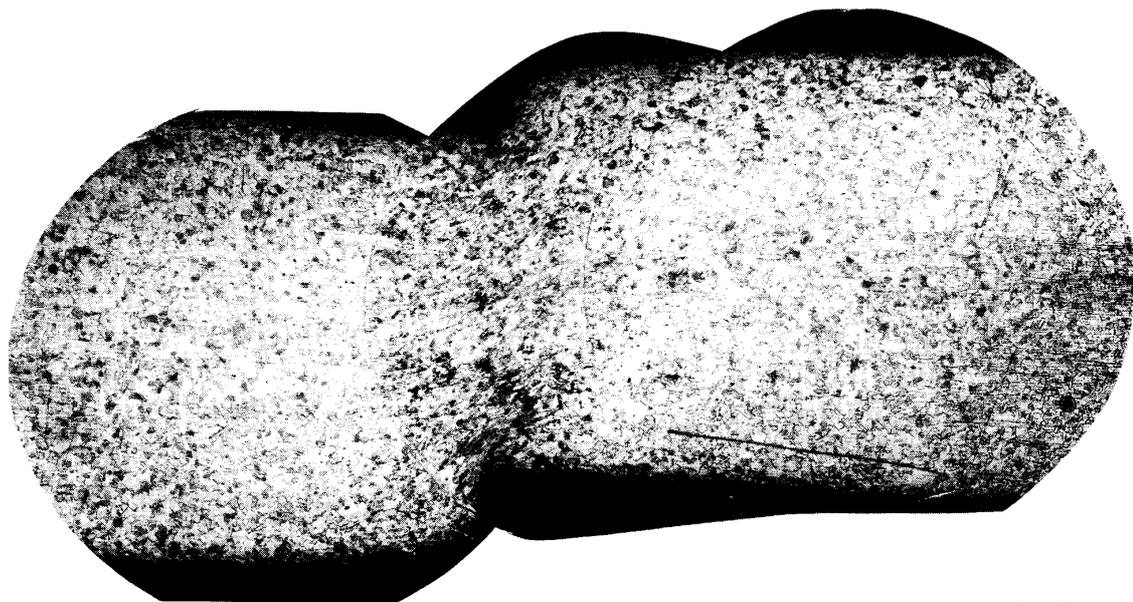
Al-clad SS Half-Way Specimen Section
